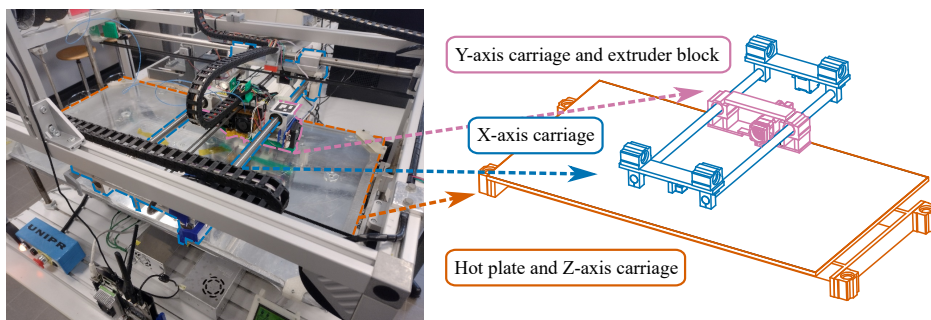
The diagram shows the main moving parts of the printer used for the tests.
